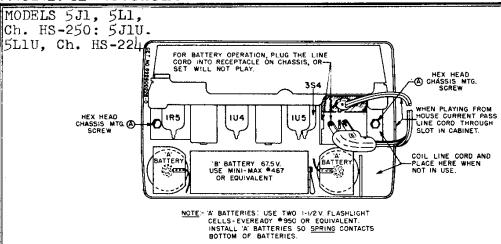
BATTERY INSTALLATION & CHASSIS REMOVAL INSTRUCTIONS
